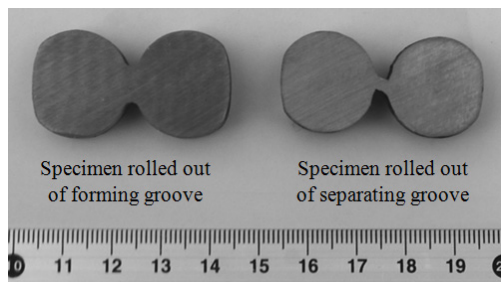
Cross sectional shapes of the specimen rolled out of the forming groove and separating groove. The breadth of the inlet square specimen is 30 mm.
